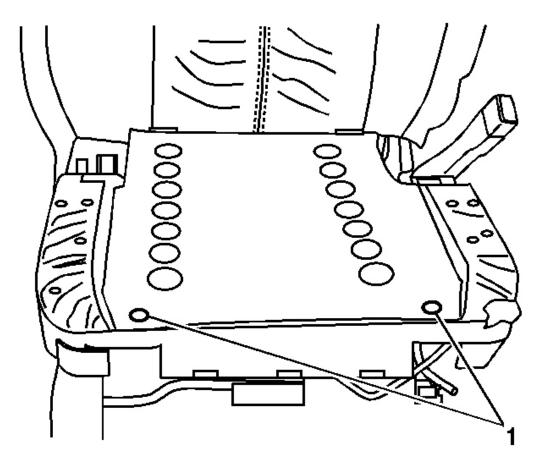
Identifying Seat Cushion Frame Bladder Retainers Courtesy of GENERAL MOTORS CORP.
